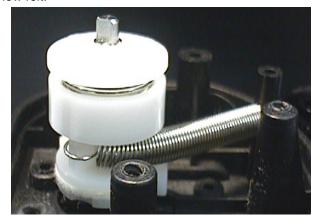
Side View of the Ribbon Supply Spindle Assembly
